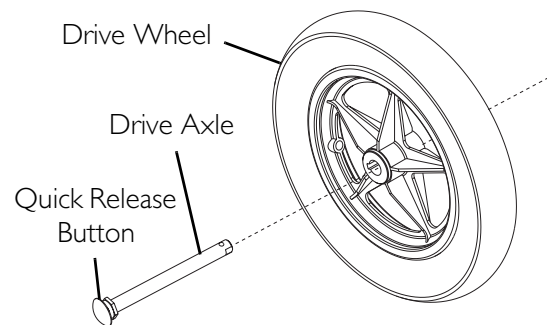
Replacing Drive Wheels on the Drive Axle
